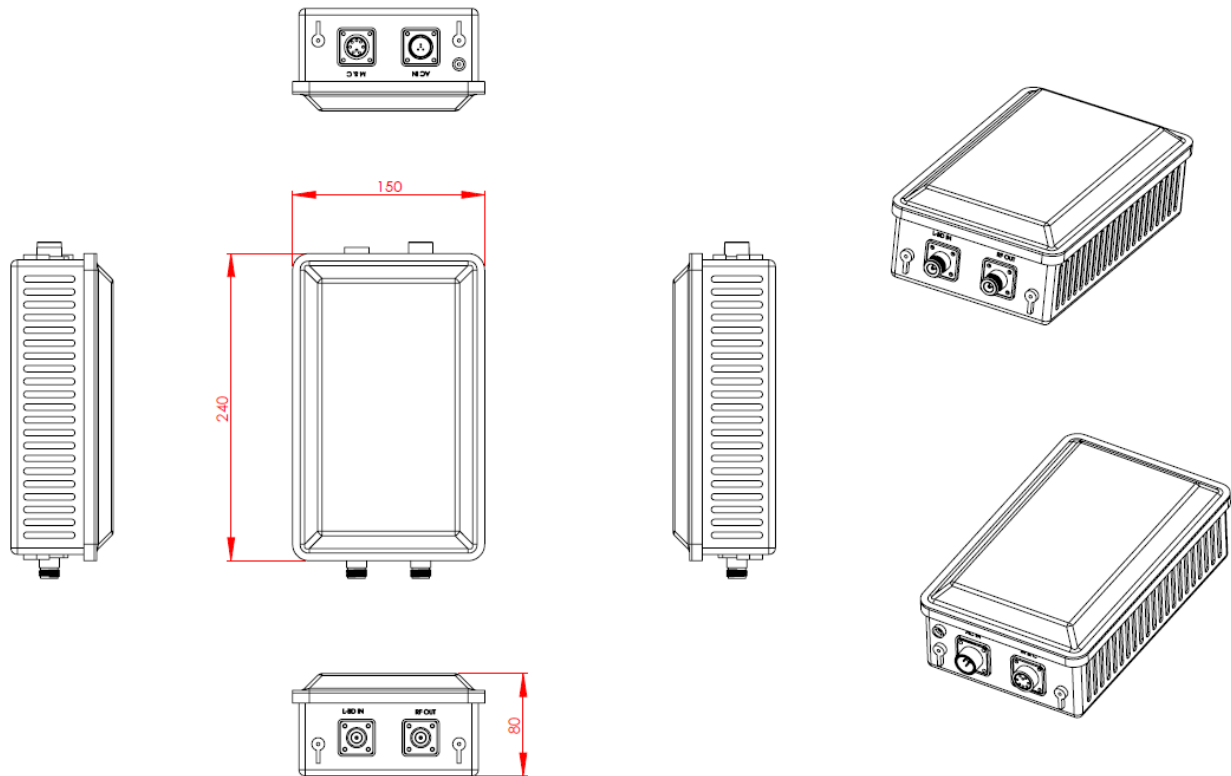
ALB190 1mW C-BUC Outline Drawing
